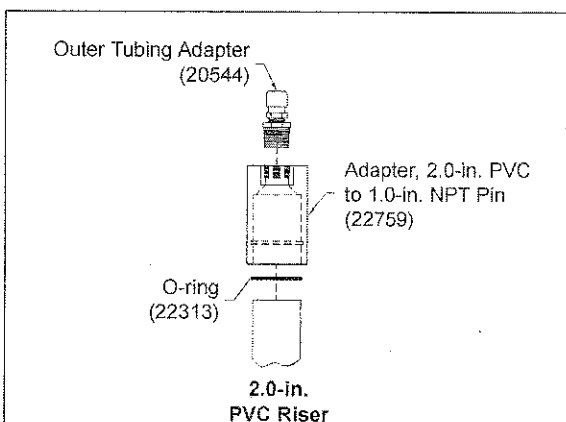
Adapters for attaching the outer tube to 2.0-inch PVC riser pipe.
